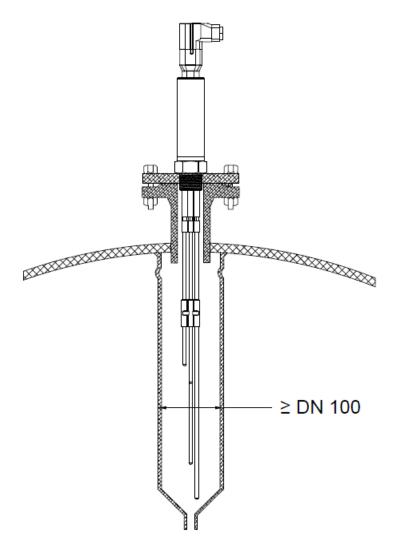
Installation of SD 2400 Level Probe to Protection Tube
